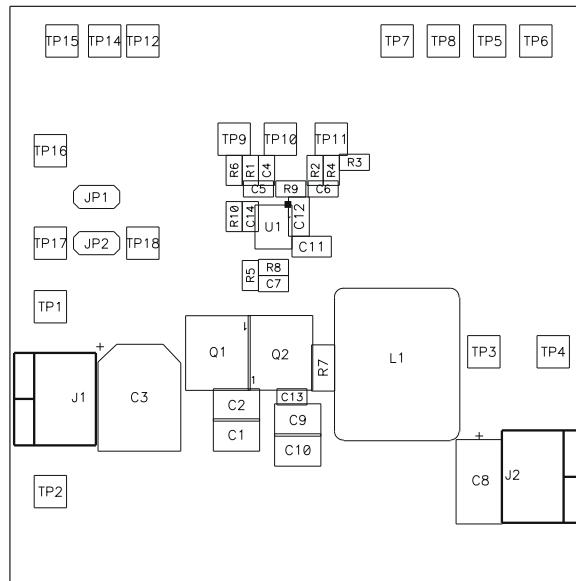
TPS40345EVM-353 Component Placement (Top View)
